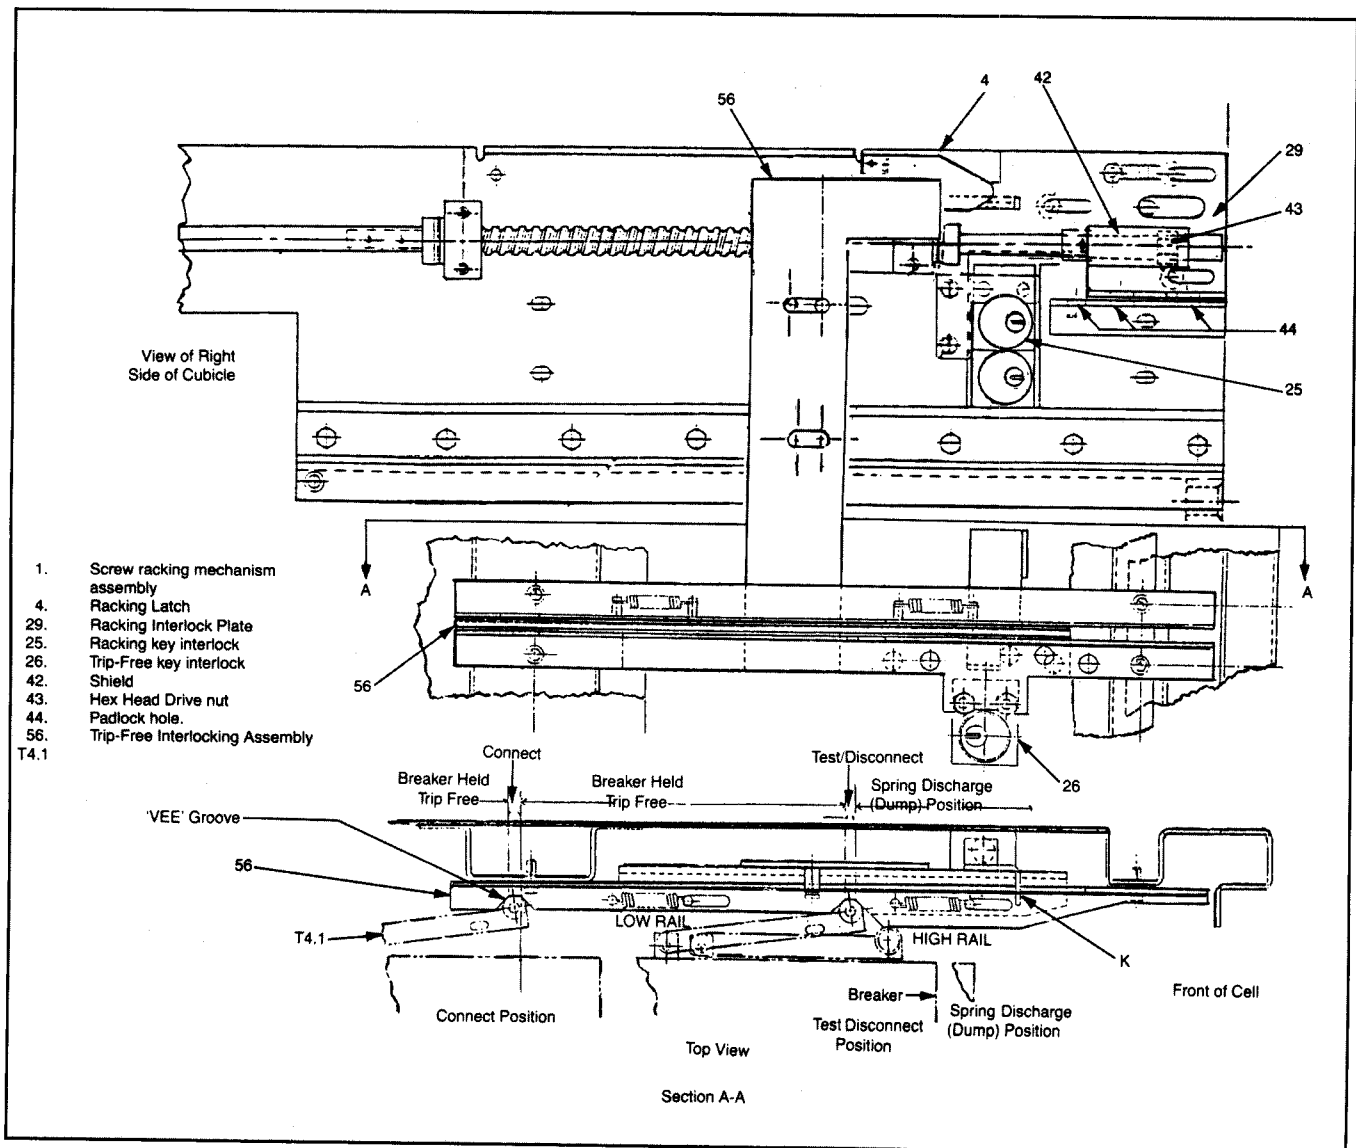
Trip-Free Interlock Assembly (Superimposed over screw racking mechanism)
